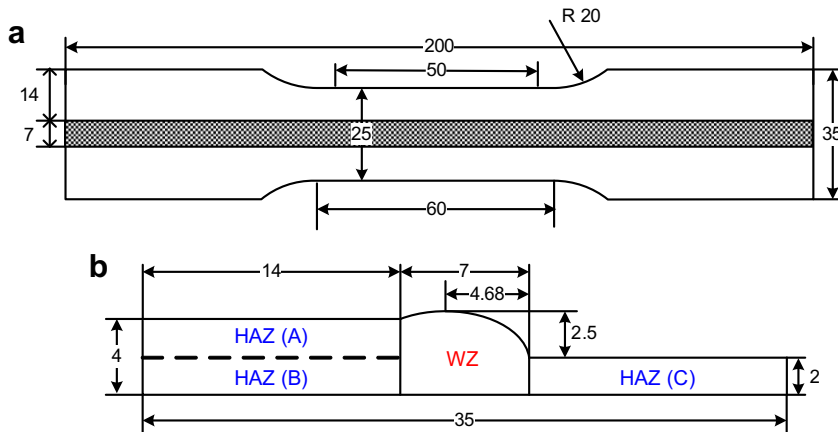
Dimensions of the longitudinal welded specimen for uni-axial tension tests (in mm): (a) top view and (b) cross-section view (enlarged by five times in scale).
